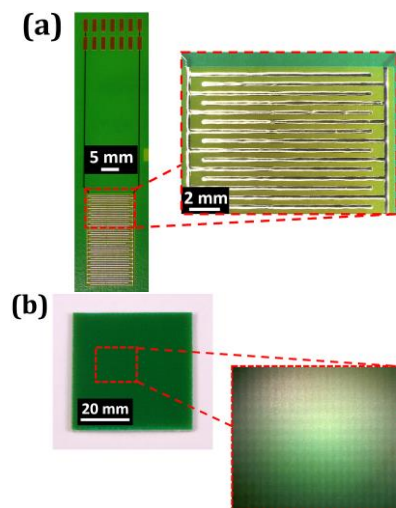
The overall view on the test boards: (a) surface insulation resistance test coupon, (b) FR-4 laminate board coated with solder mask.
